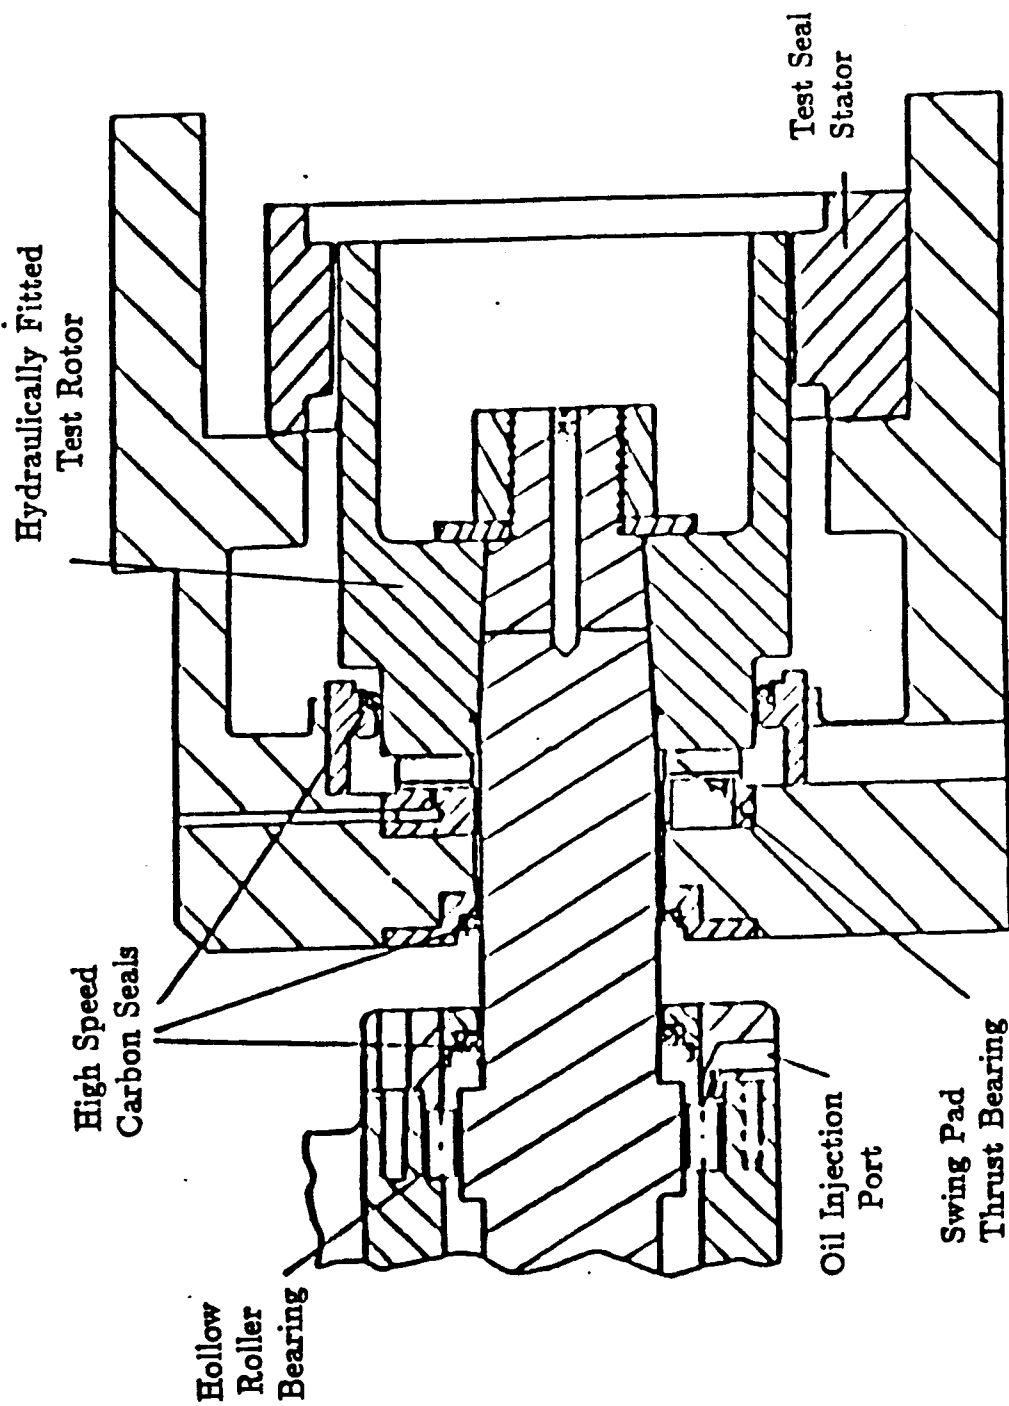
Cross-sectional view of test section showing rotor-shaft assembly.
